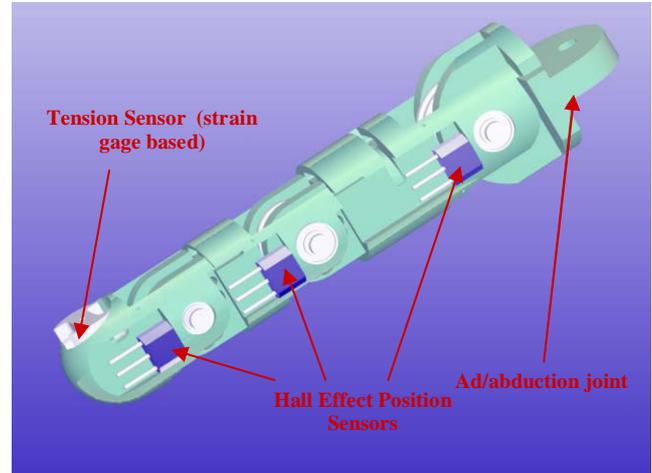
The CAD drawing of Cub Finger (fully under-actuated finger).
